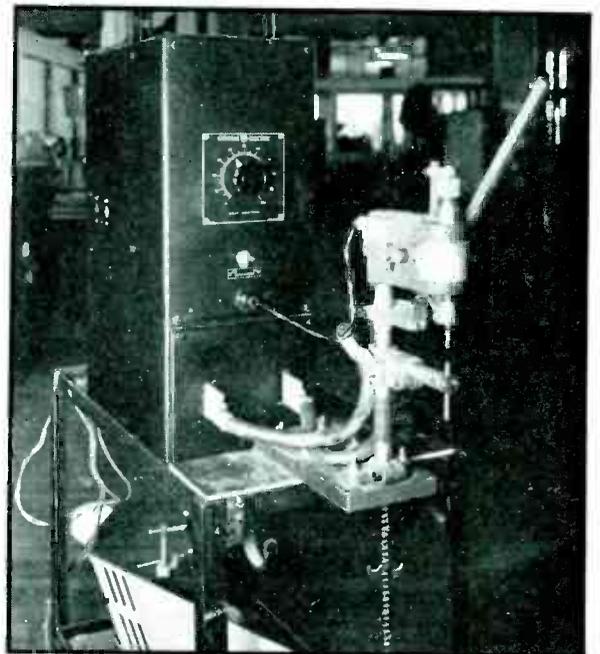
Typical one-half cycle welding control with heat control
